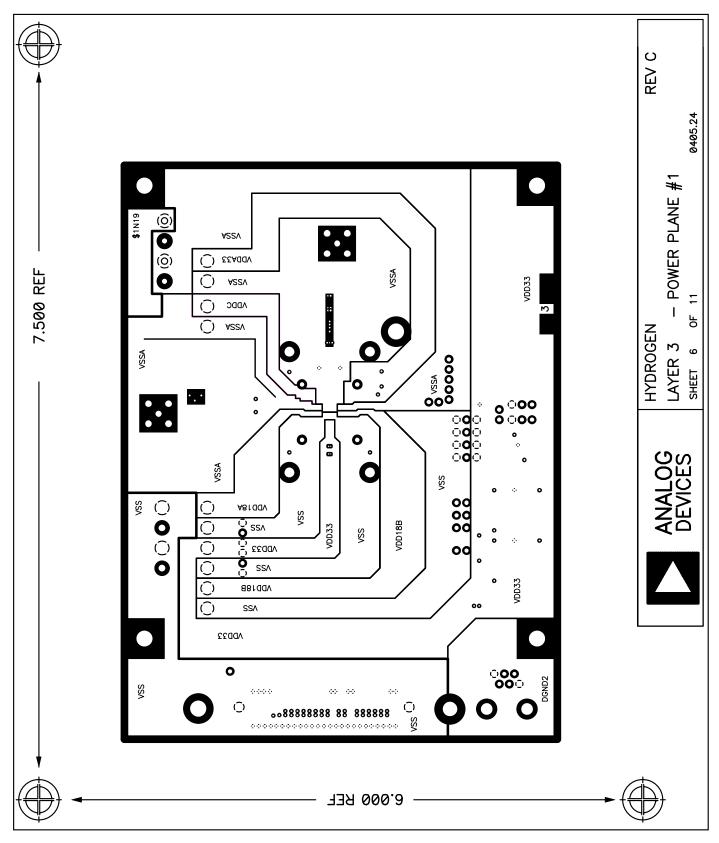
PCB Layout Layer 3, AD9736 Evaluation Board, Rev C
